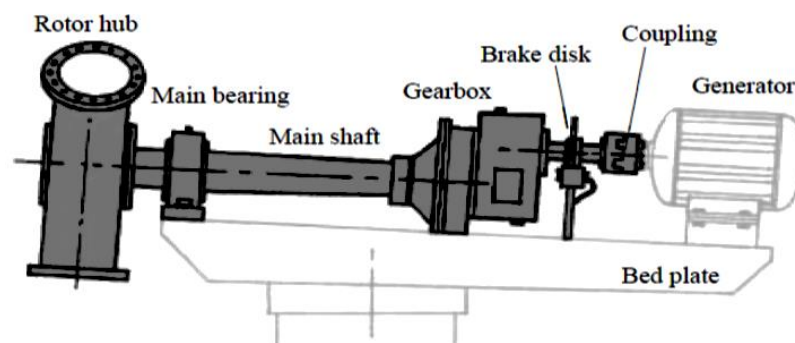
Configuration of wind turbine drivetrain with gearbox [14]
